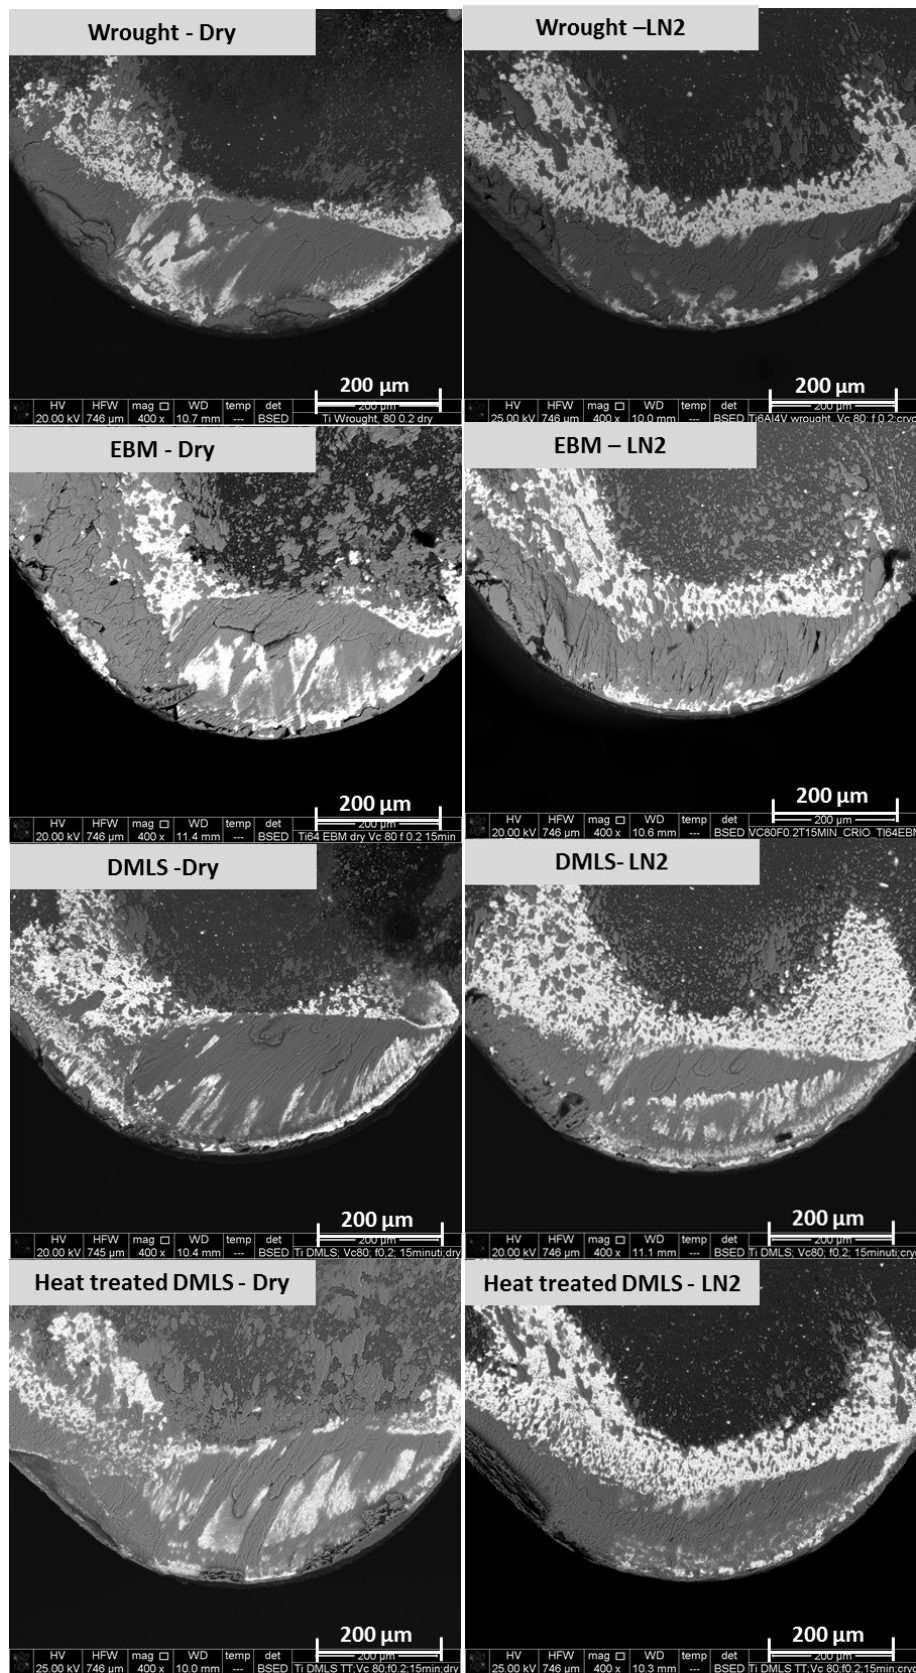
SEM images of the worn tool rake faces after 15 minutes of turning under dry cutting and cryogenic cooling.
